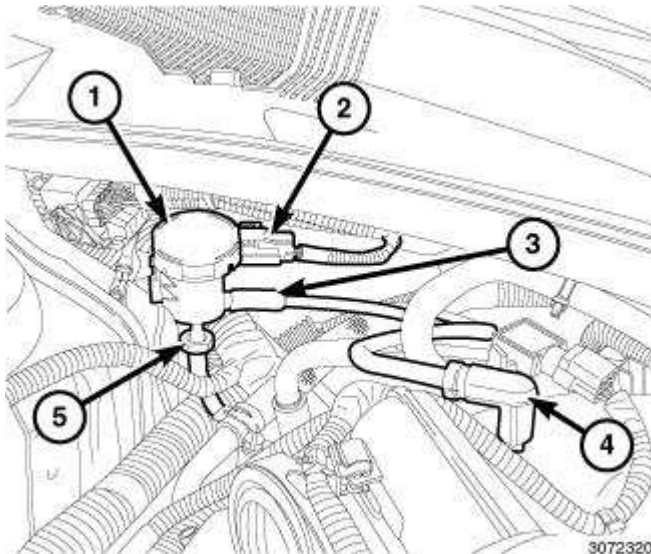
EVAP Purge Solenoid, Electrical Connector & Vacuum Lines
